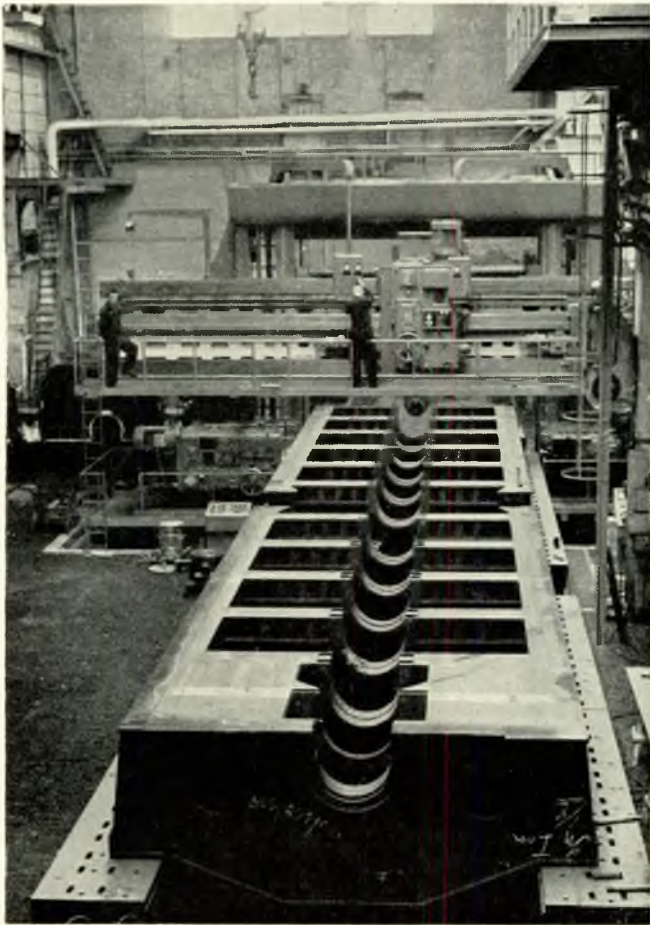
Welded bedplate in a combined milling and planing machine
